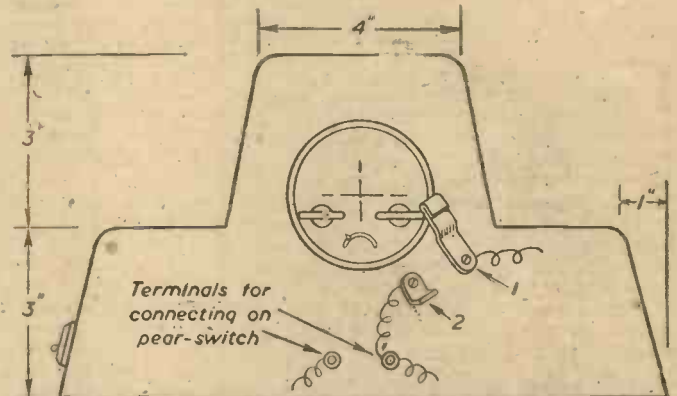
Rear view of clock, showing arrangement of contact brackets.
